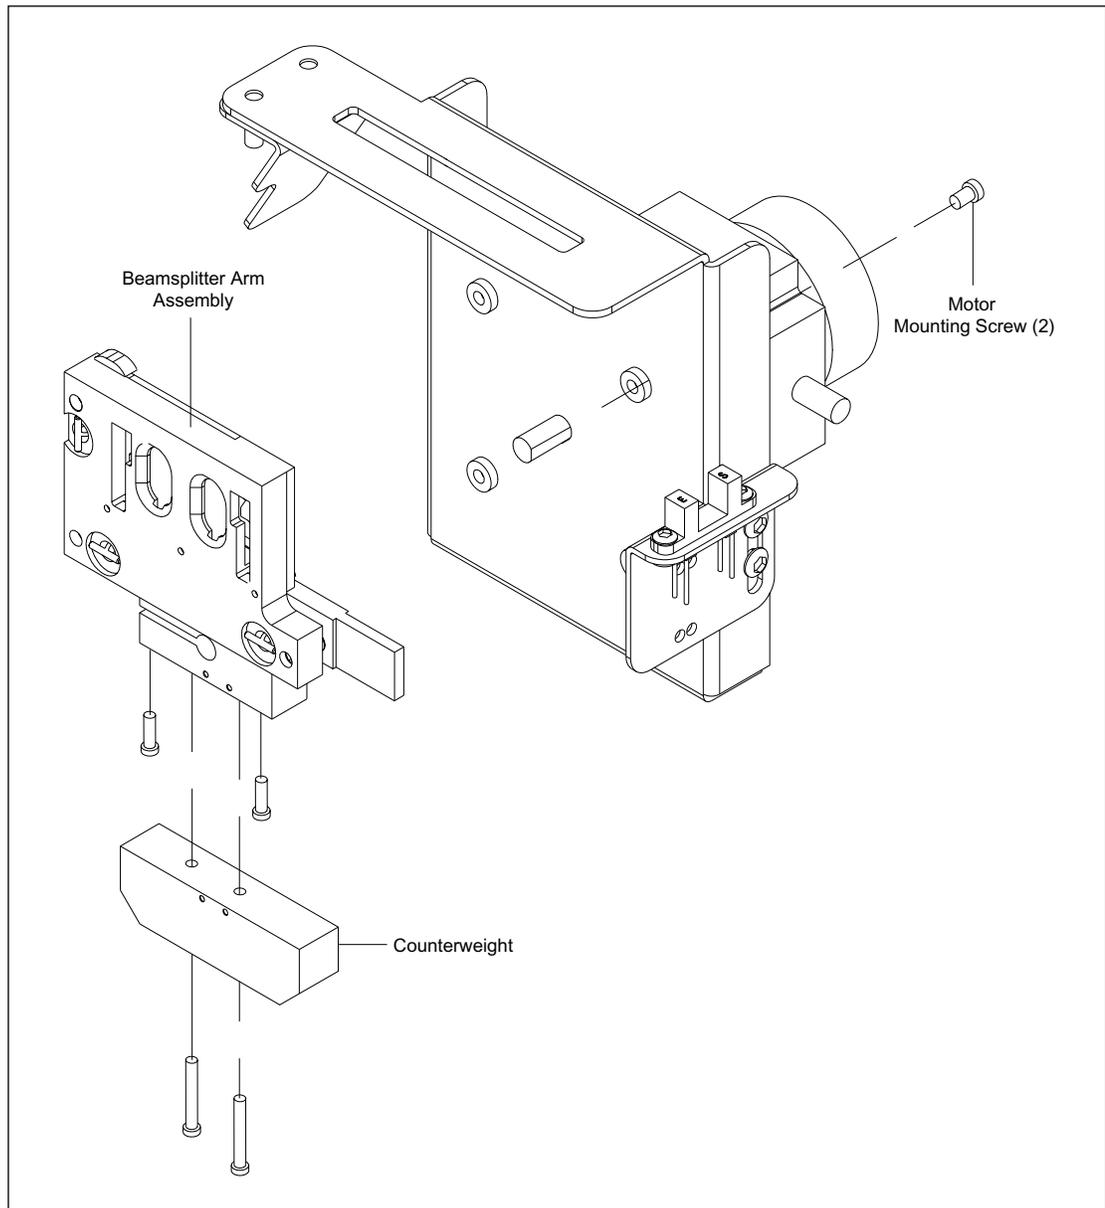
Secondary Beamsplitter Arm Assembly Mounting.
